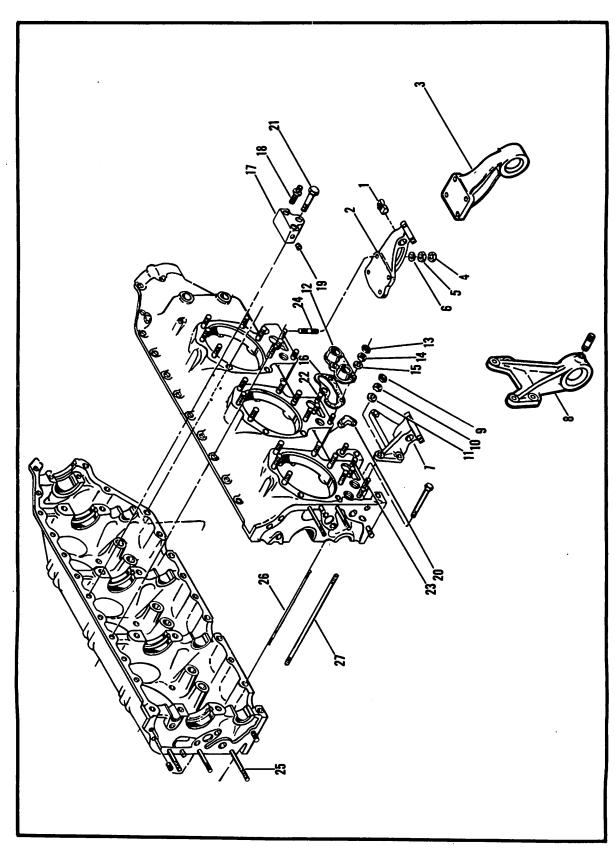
Pushrod Flange and Engine Mount Installation - Crankcase
